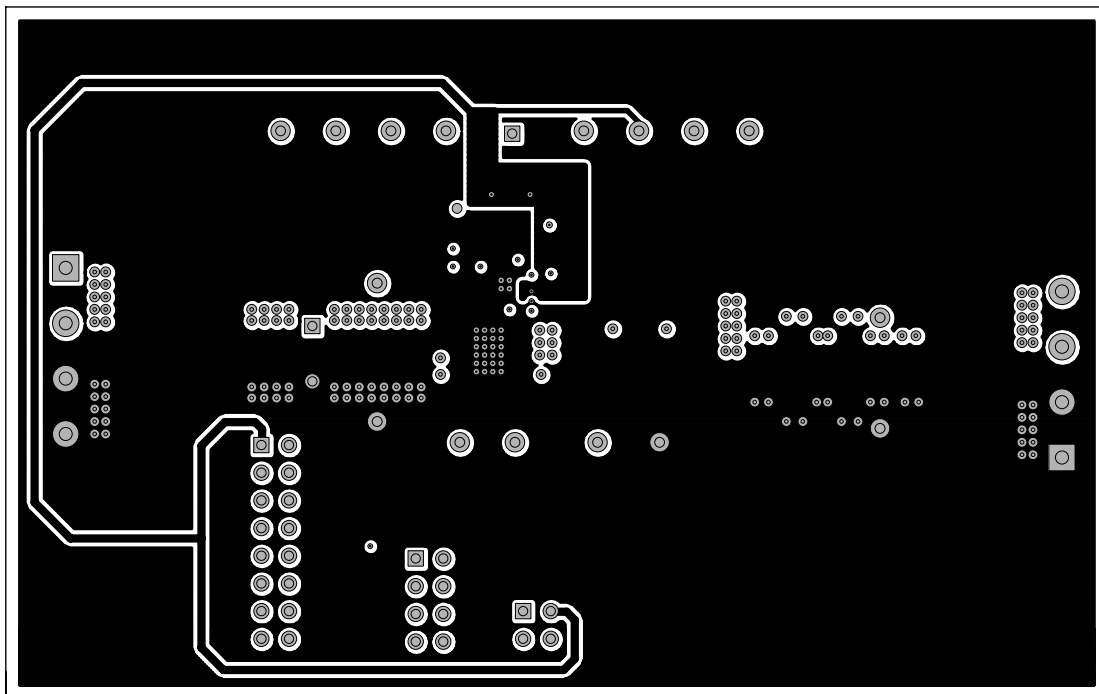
TPS53219EVM-690 Top Layer Assembly Drawing (Top view)
